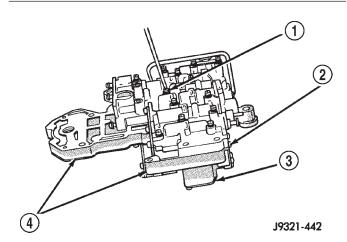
Installing Lower Housing On Transfer Plate And Upper Housing
